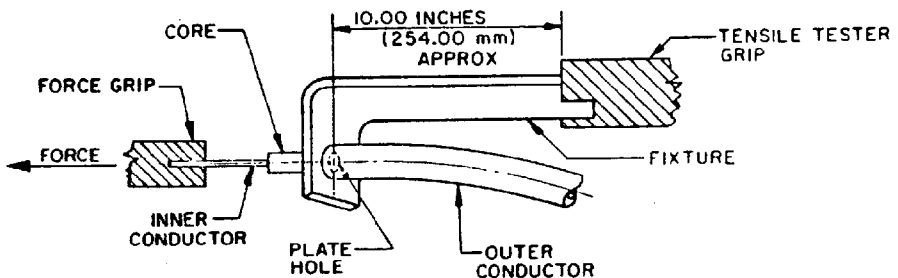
Typical test fixture for use with Semi-rigid cables.
